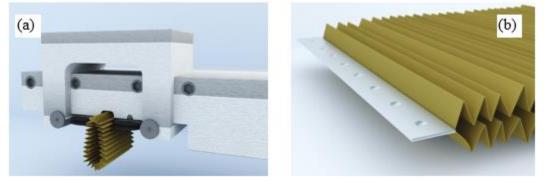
Schematic representation of the method of joining with metal clips, a) Clip machine, b) Paper joined with metal clip.
